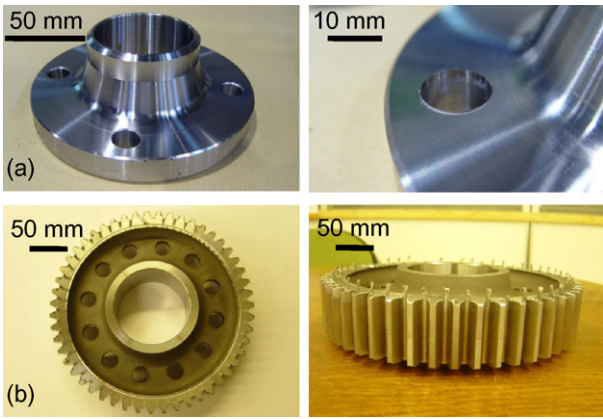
(a) Flange for oil pipes; (b) Gear [5].
